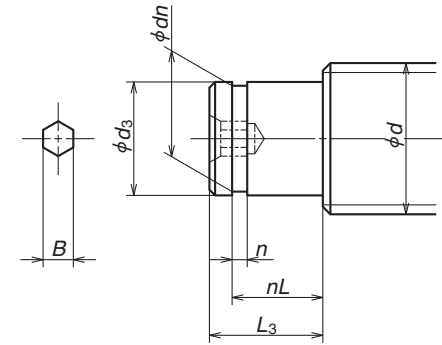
Shaft end configuration of R Series (opposite to the drive side)
